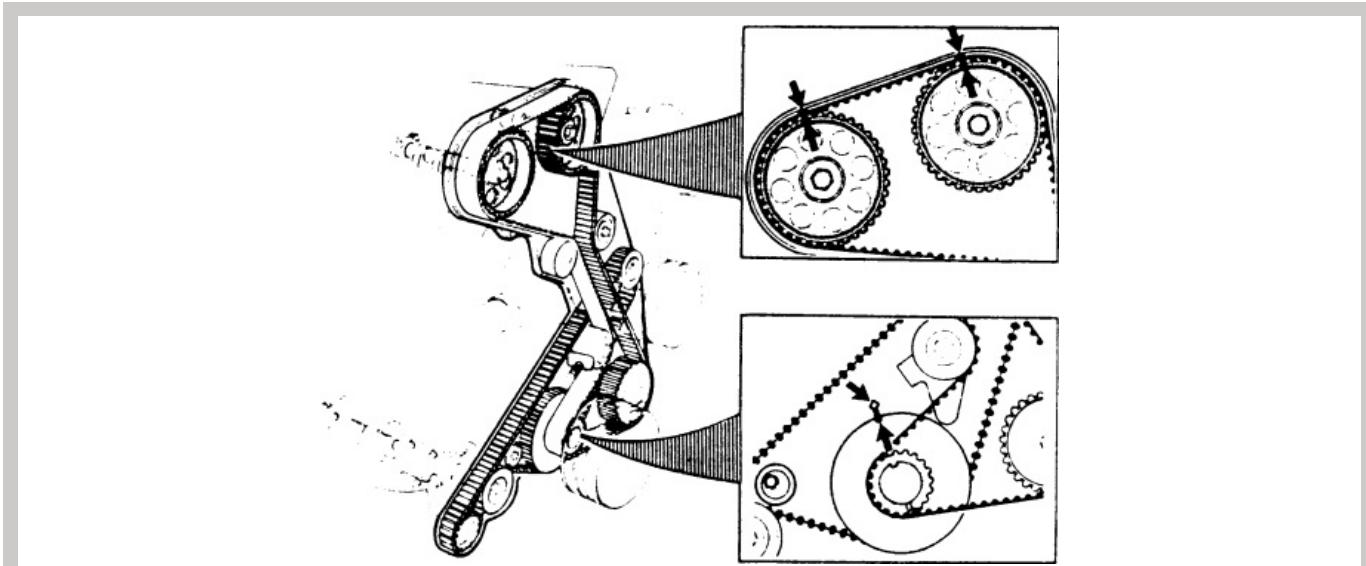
Align the marks on the timing gears before removing the belt
